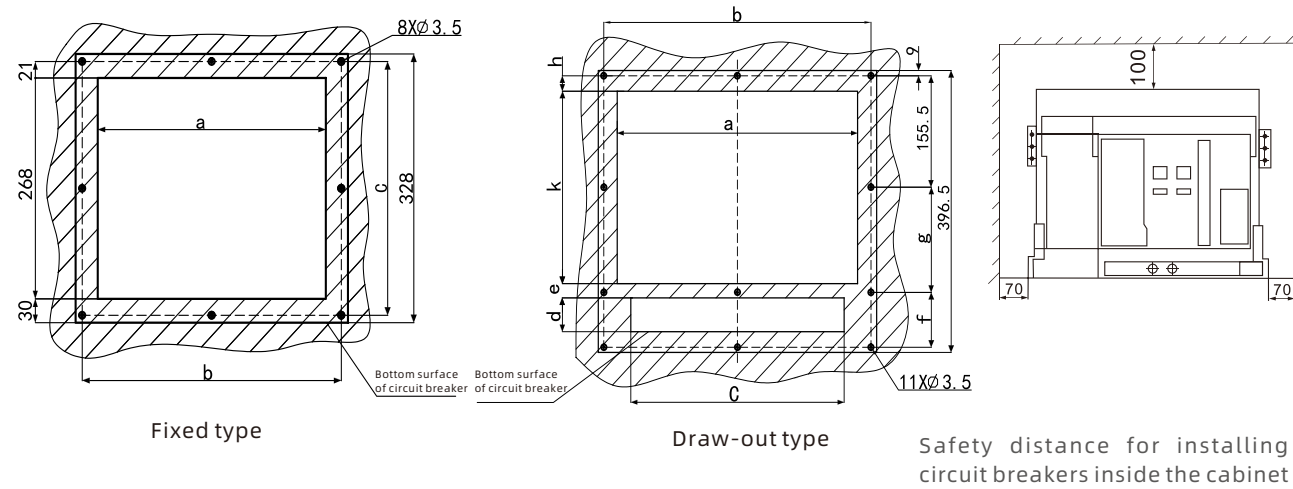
Draw-out circuit breaker overall and installation dimensions (ARW1-6300/4 In=6300A)
